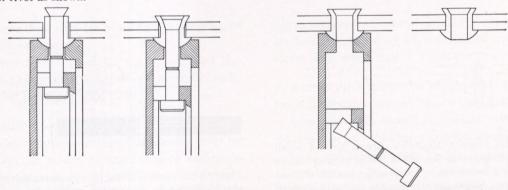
Pull-through type Cherry Blind Rivet assembly is inserted in hole. Gun pulls conical head of stem into rivet, upsetting rivet tail to form tulip head. Continuing pull draws conical head entirely through rivet, thereby expanding shank. Stem falls out through slot in head of gun. This system avoids any broken stem inside the assembly.
